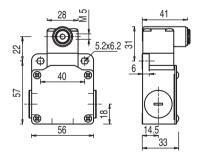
Dimensions of S300-M13C3-M20-SB in mm
